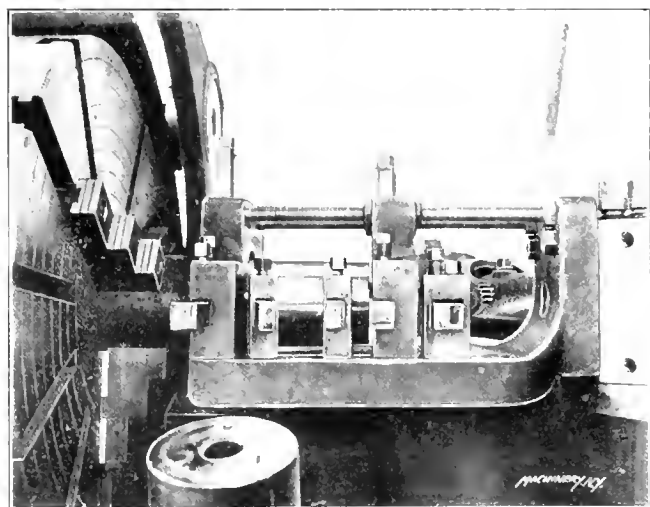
Front View of Box Tool showing Adjustability of Blades and Back Rests.
